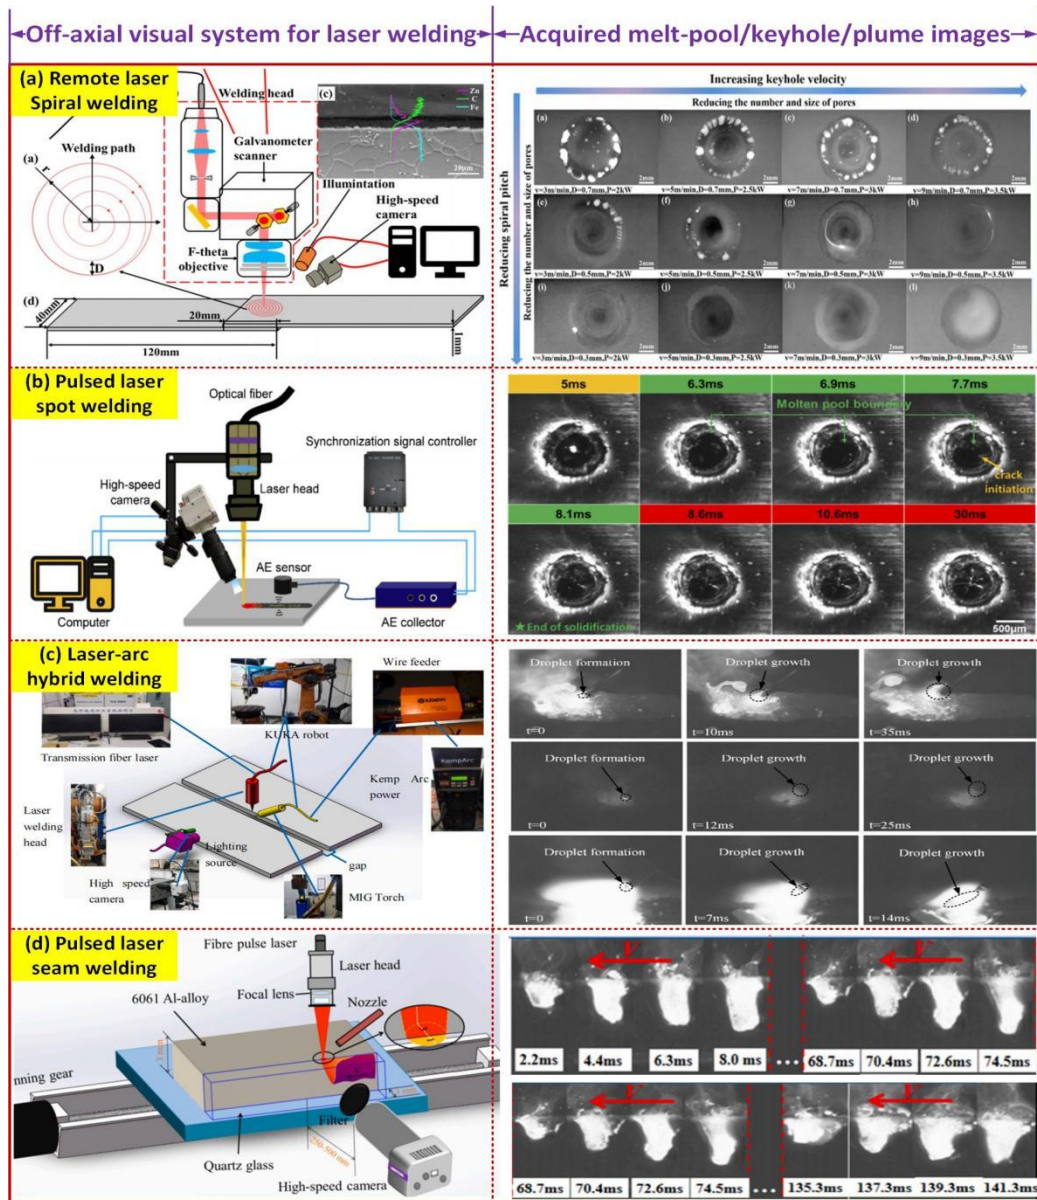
The developed off-axis visual sensing platforms for capturing the images of keyhole, melt pool and plume for the laser-based manufacturing process: (a) Remote laser welding [74]; (b) pulsed laser spot welding [75]-[76],[202]; (c) laser-arc hybrid welding [77]-[79]; (d) pulsed laser seam welding [124].
